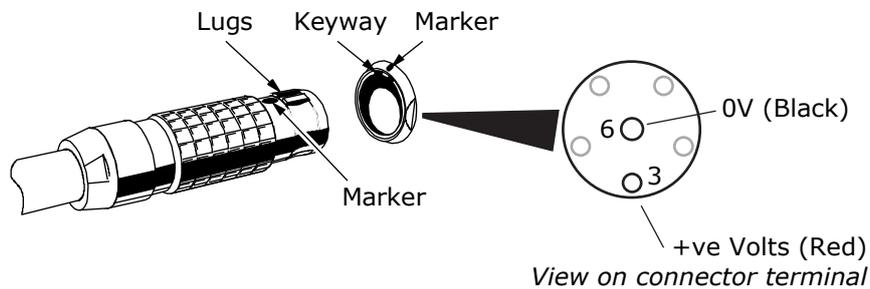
Connecting the 6-way plug to the RT8B Thermometer
